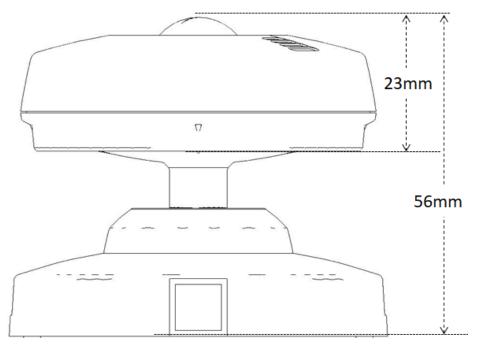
Modbus 4in1 Sensor Dimension - Side View
